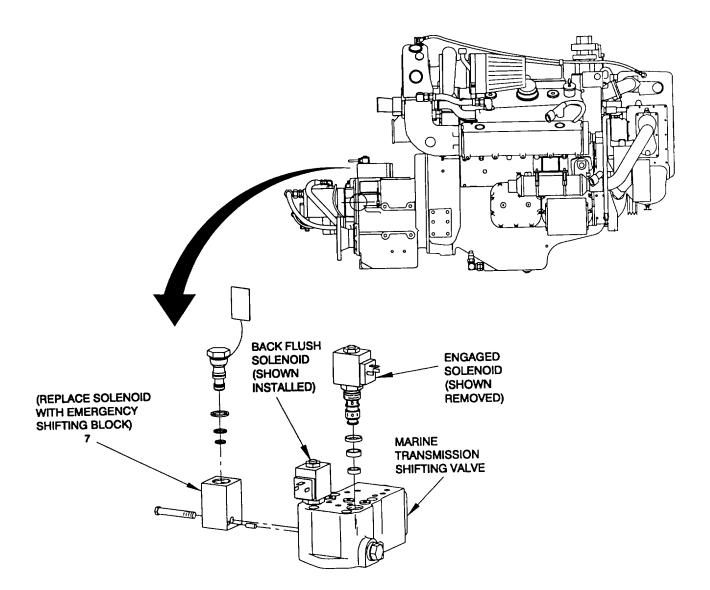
Emergency Shifting and Steering Controls and Indicators (Sheet 2 of 2).
